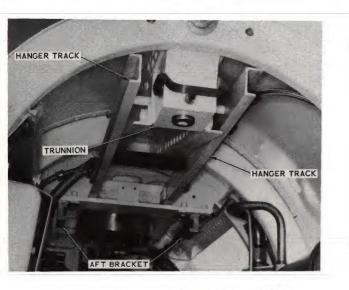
Gun Hanger Tracks and Aft Brackets Lubrication Points
